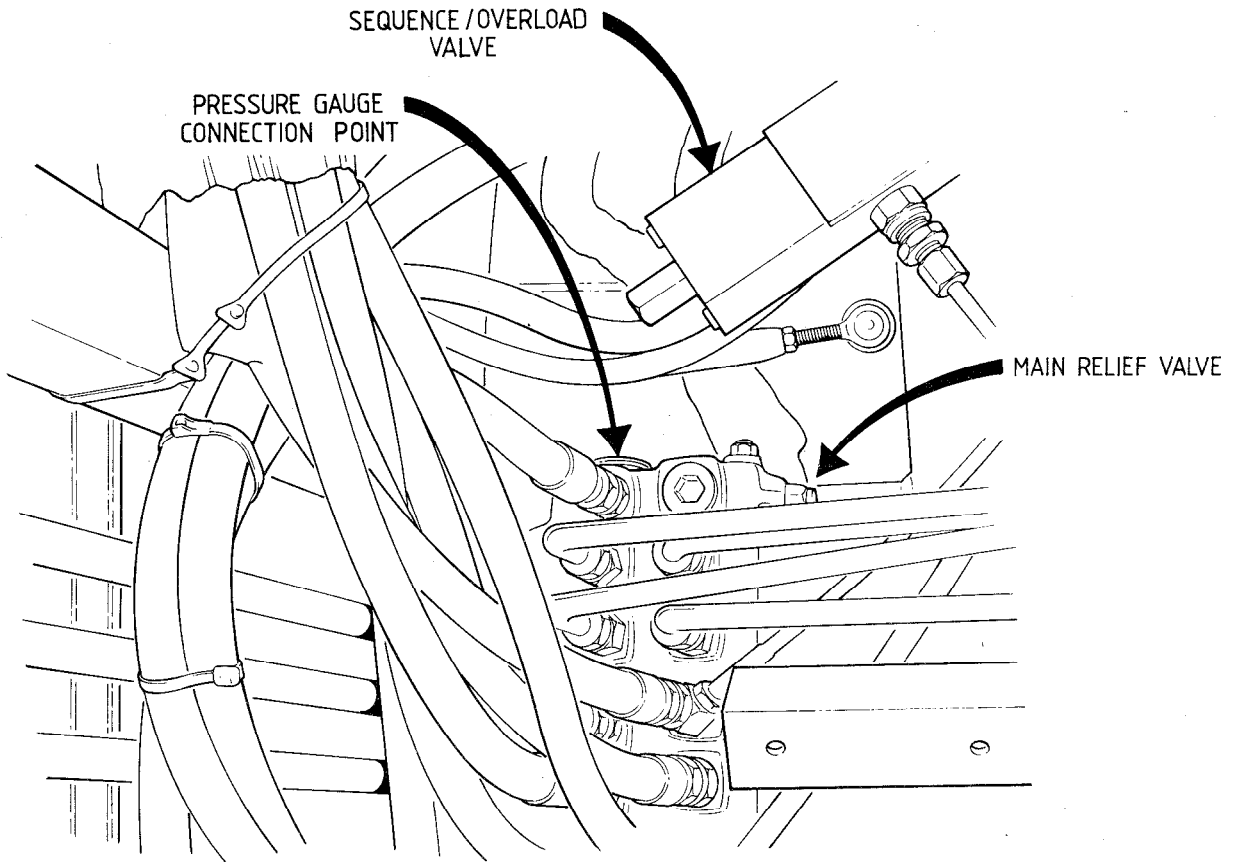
VALVE BANK, PROTECTION COVER REMOVED
